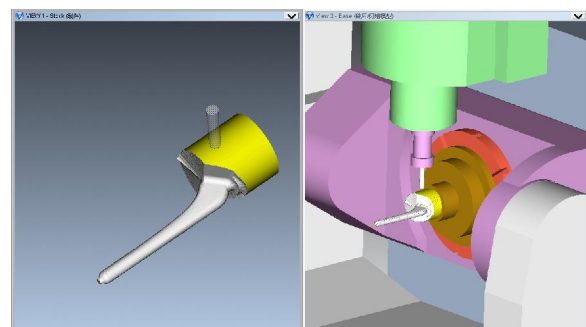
The multi-axis machining of model material on five-axis machine tool.
